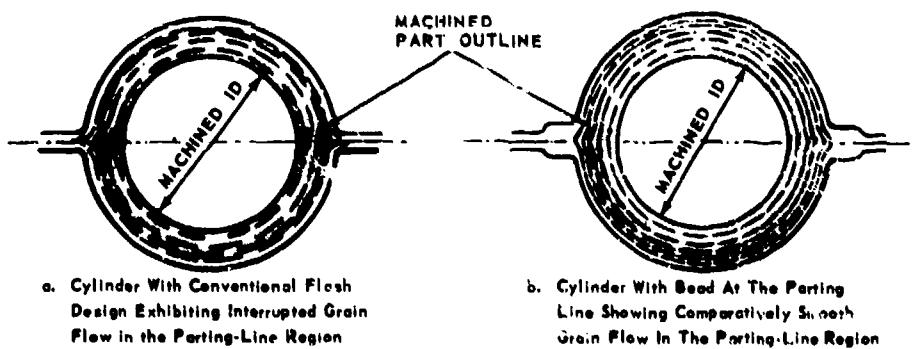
METHOD OF IMPROVING GRAIN-FLOW PATTERN IN CYLINDRICAL FORGINGS BY USING A BEAD AT THE PARTING LINE
